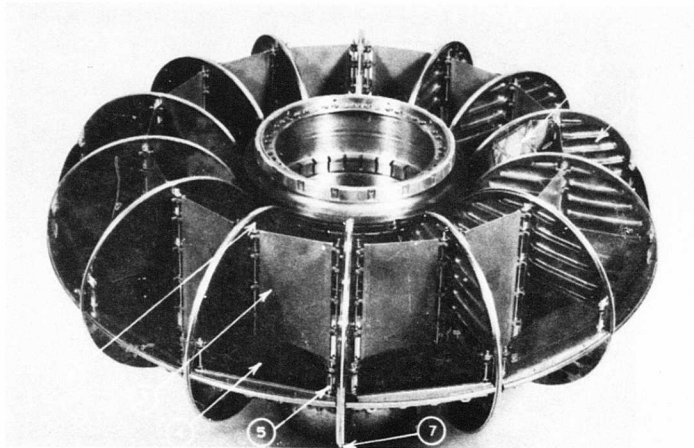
Partially Built-Up Hub: (1) Bulkhead Assembly, (2) Tie-Plate Pin, (3) Inner Tie Plate, (4) Outer Tie Plate and Seal Assembly, (5) Tie-Plate Pin, (6) Inner Matrix Package, (7) Piston Ring.
